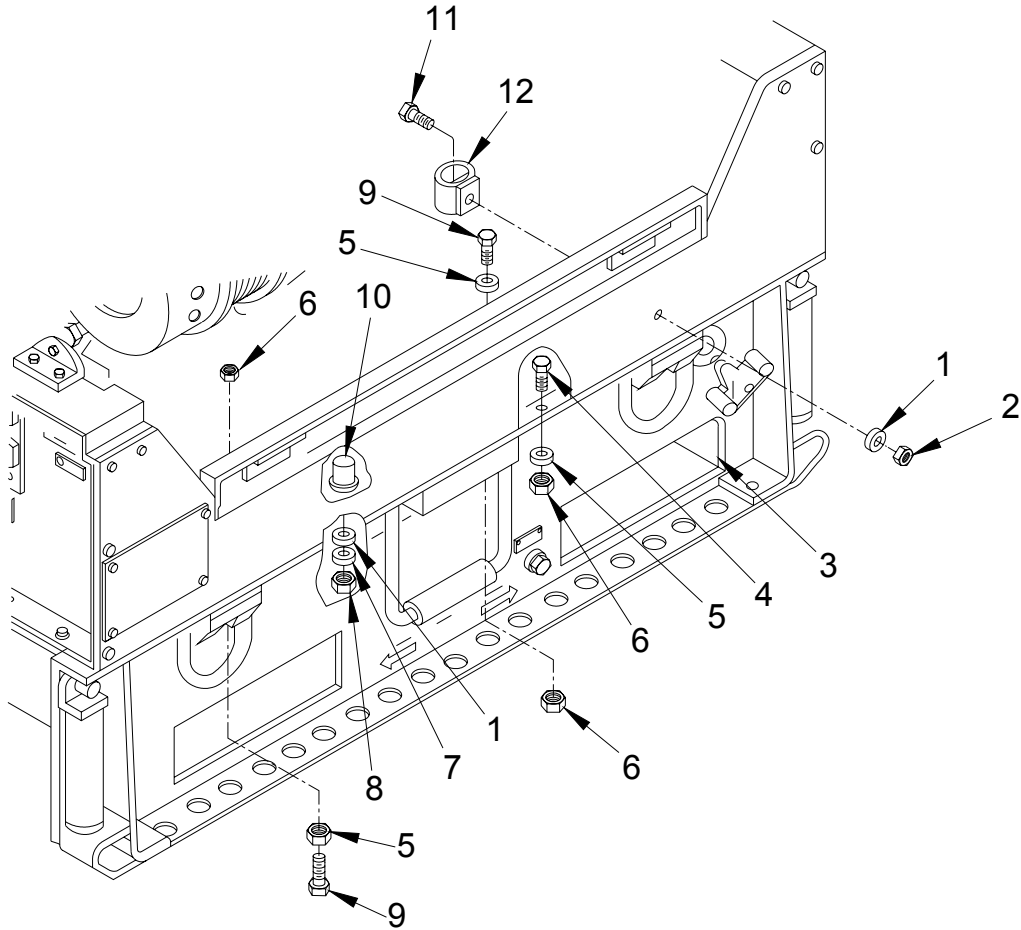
FRAME AND HOUSING ASSEMBLY/SKID BASE
